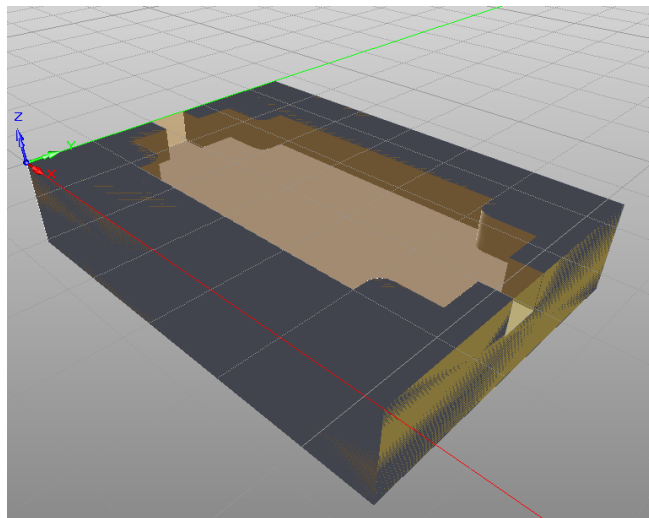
igs file imported to Visual Mill 6.0 showing the channel to be machined.
